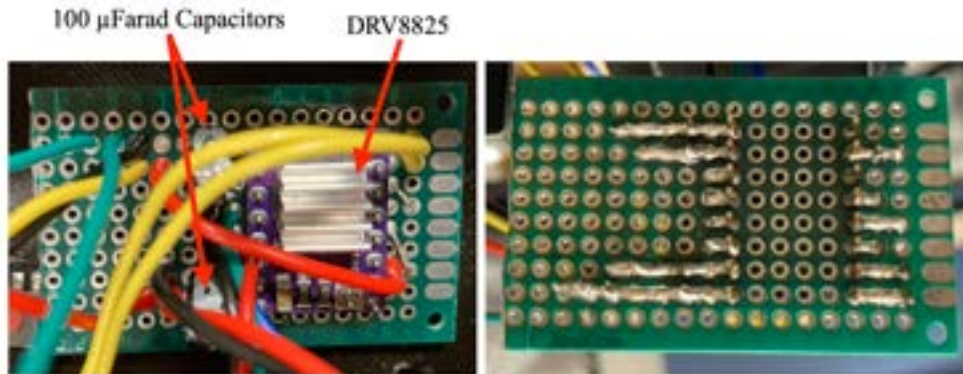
Figure X. Solder board. The image on the left shows the top face of the solder board populated with the DRV8825, two 100 μ Farad capacitors, and wire connections. The image on the right shows the bottom face of the solder board with the ties for each row of connections.
